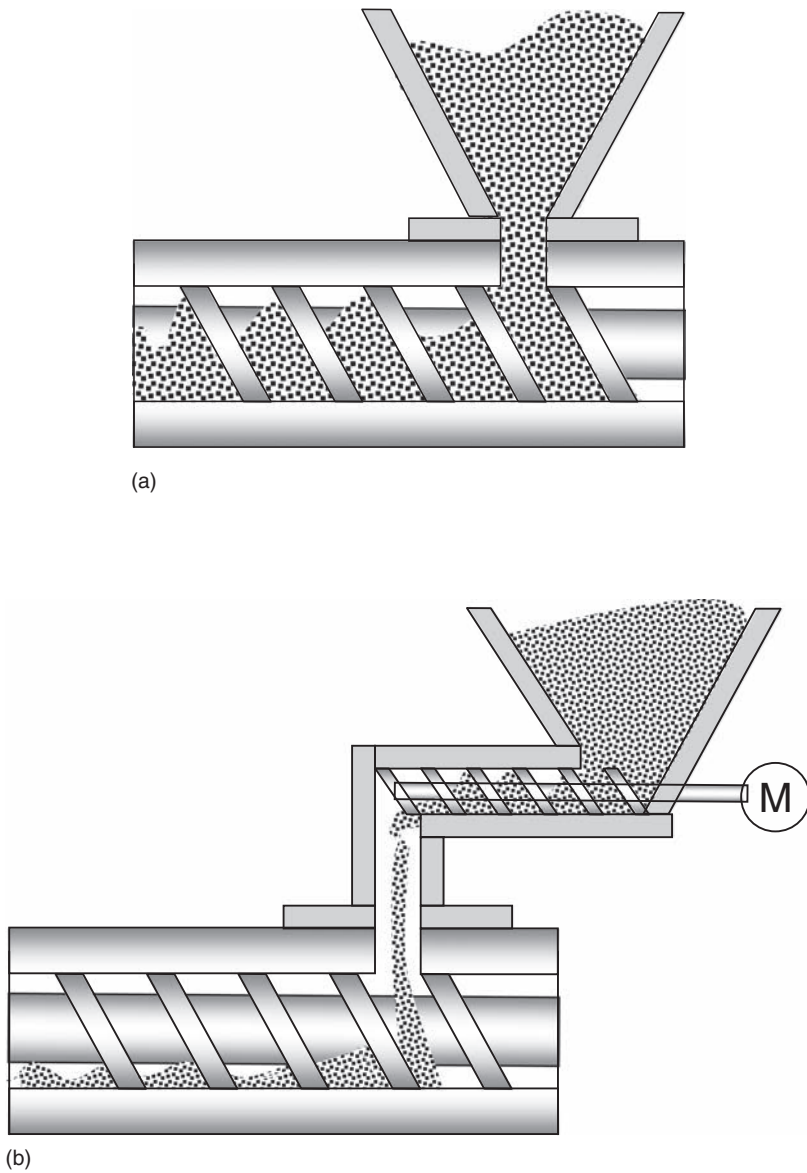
The feeding techniques used in magnesium molding: a concept of uncontrolled dosing of the feedstock—flood feeding; b concept of controlled dosing of the feedstock—starve feeding
